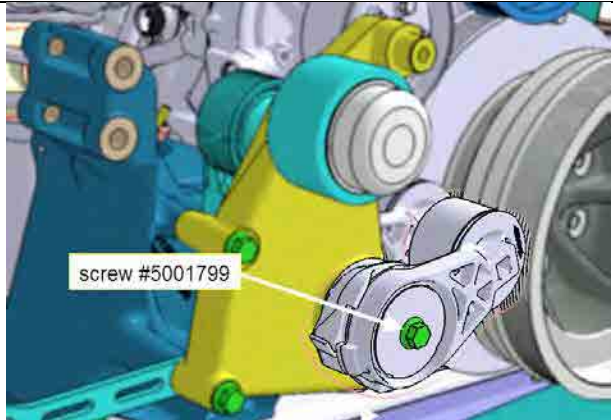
TENSIONER MOUNTING SCREW TORQUE : 48 lb-ft
